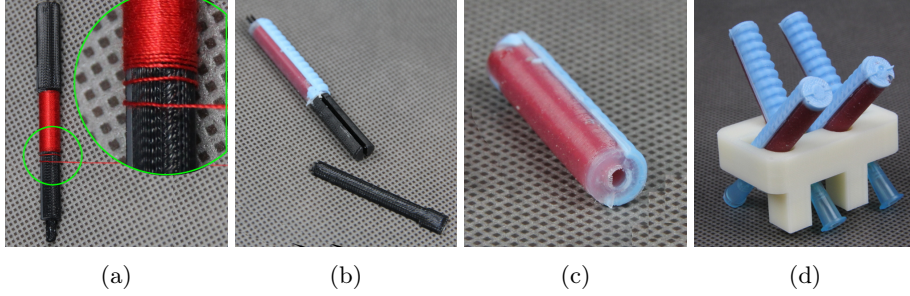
Manufacturing steps: (a) chamber reinforcement preparation, (b) rod removal (core goes first), (c) inner chamber wall moulding, (d) final moulding.
